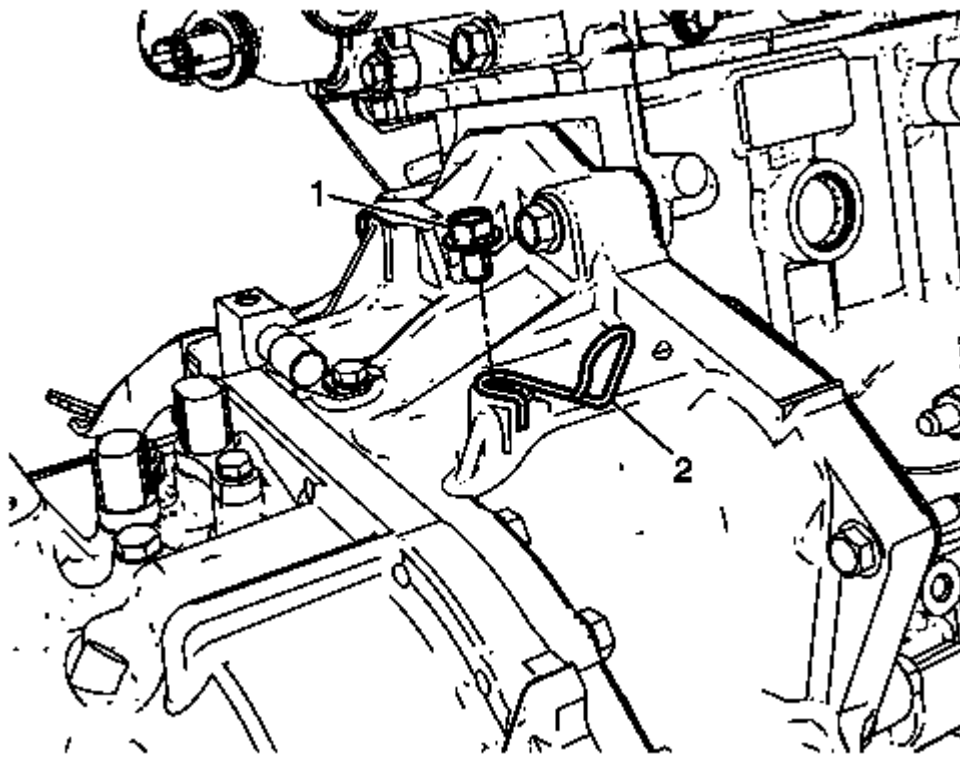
Selector Control Cable Clamp Bolt And Clamp
